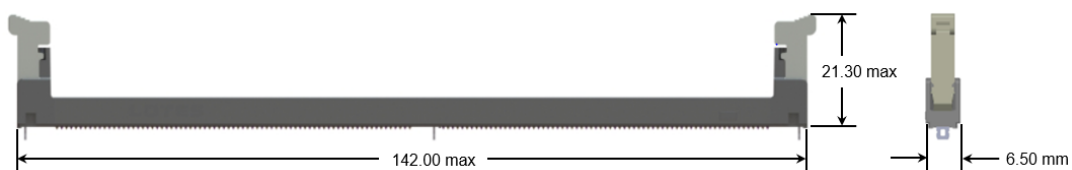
DDR5 U/R/LR DIMM Surface Mount (SMT) Connector Socket Outline
